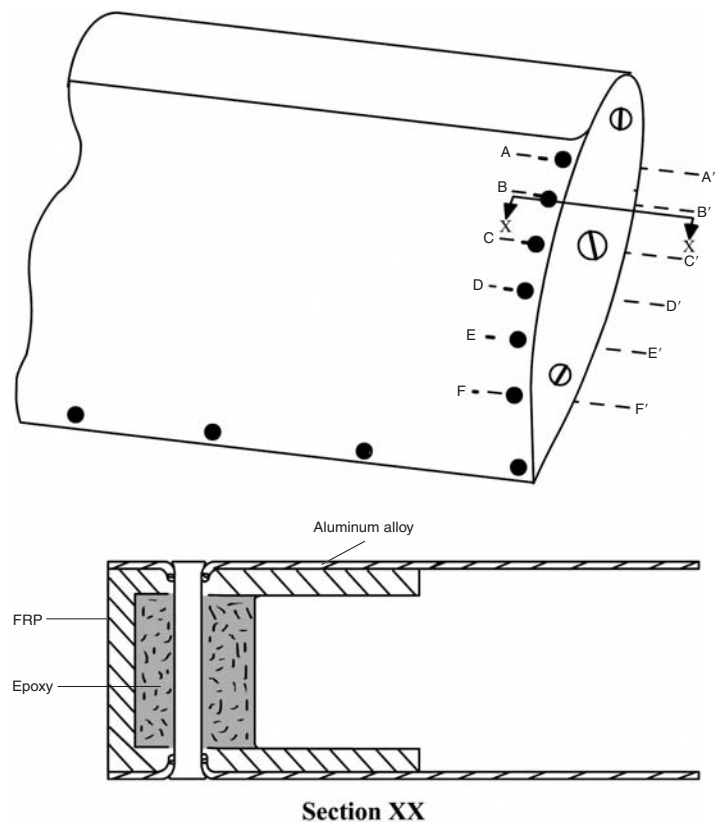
Sketch showing the fastening of the rib to the blade
